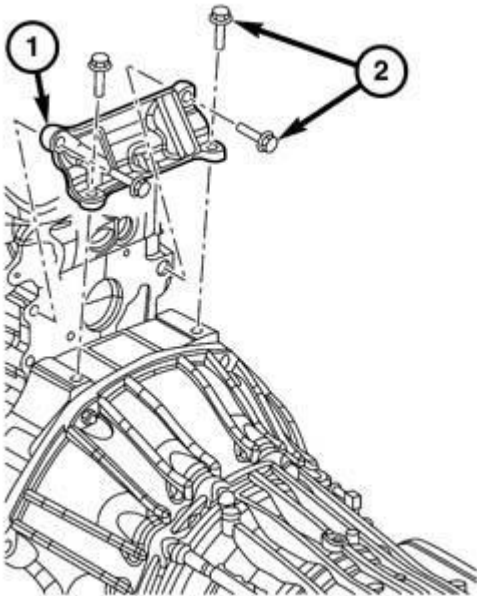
Right Engine Block Stiffener, Bolts & Engine Block
